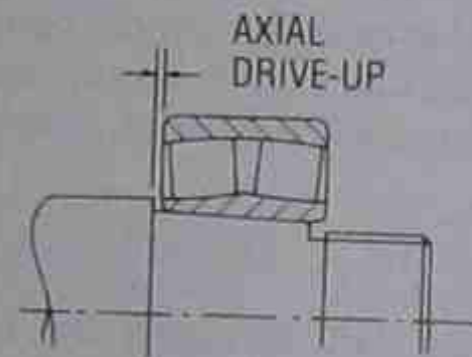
Axial drive-up used as a measure of interference fit.
